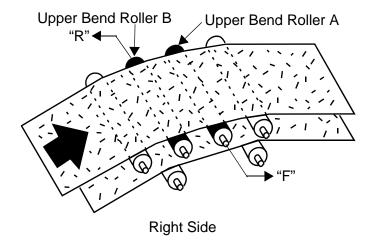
Adjusting Upper Bend Roller for Tracking the Upper Run of Belting
